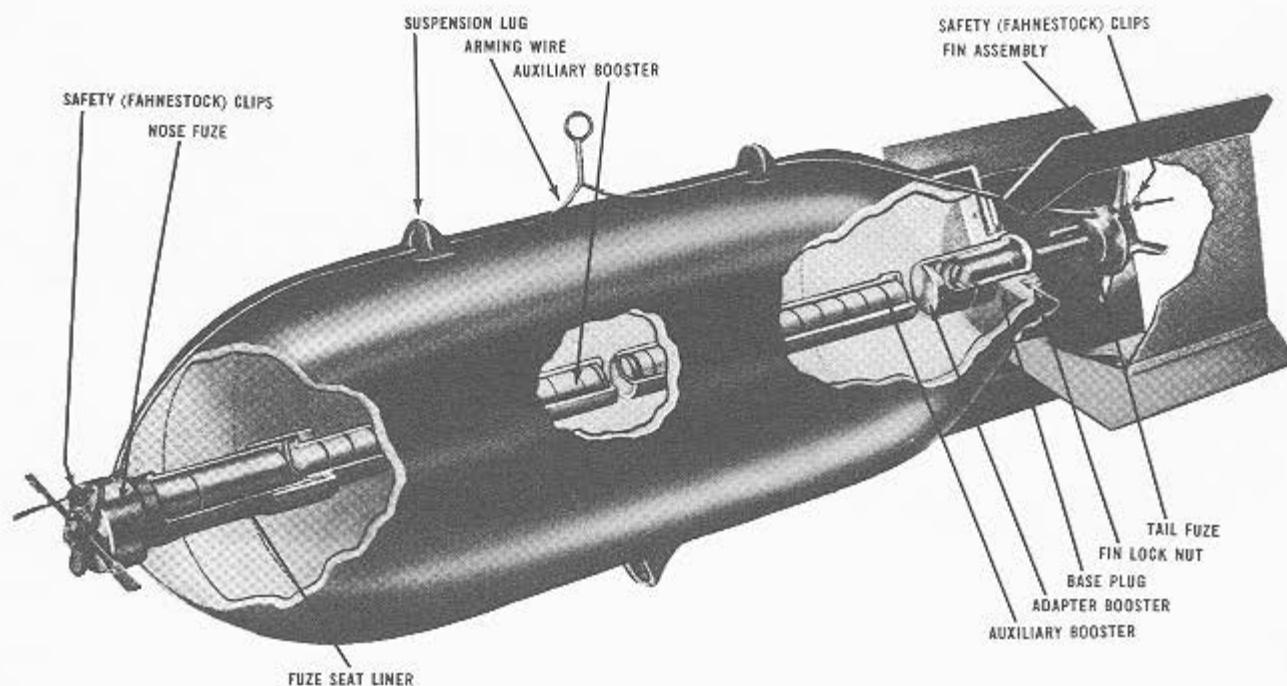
F3.—A general-purpose bomb assembled for loading.
